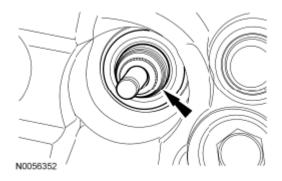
Identifying Valve Spring Compressors Courtesy of FORD MOTOR CO.
